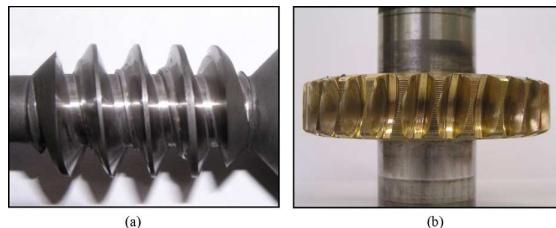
(a) Worn surface of the worm screw gear after test Second
